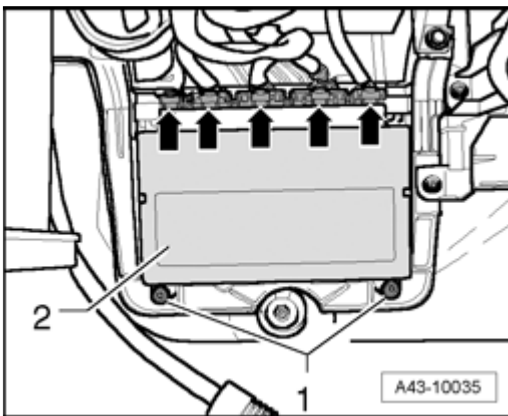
Identifying Bolts, Control Module, And Electrical Harness Connector
